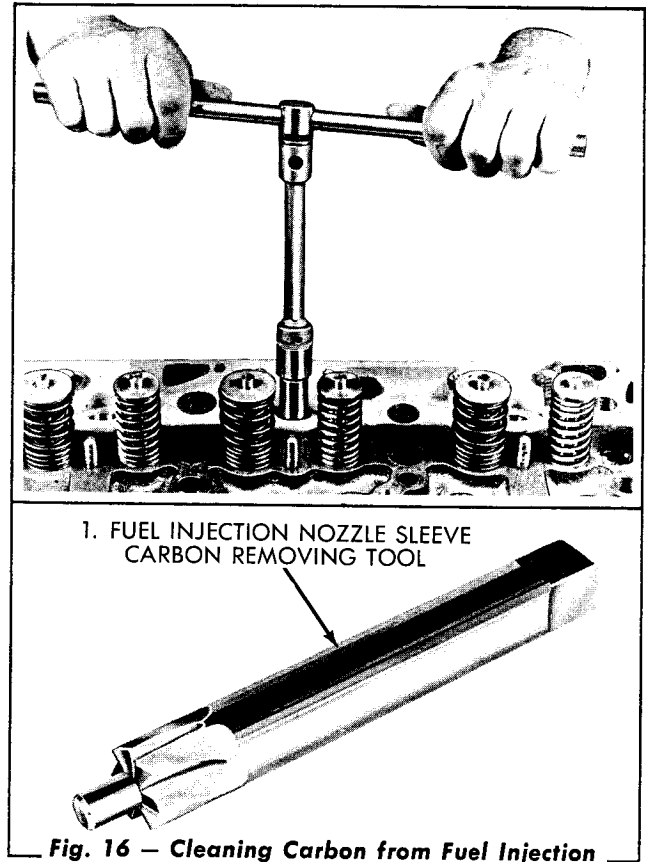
Cleaning Carbon from Fuel Injection Nozzle Sleeve
